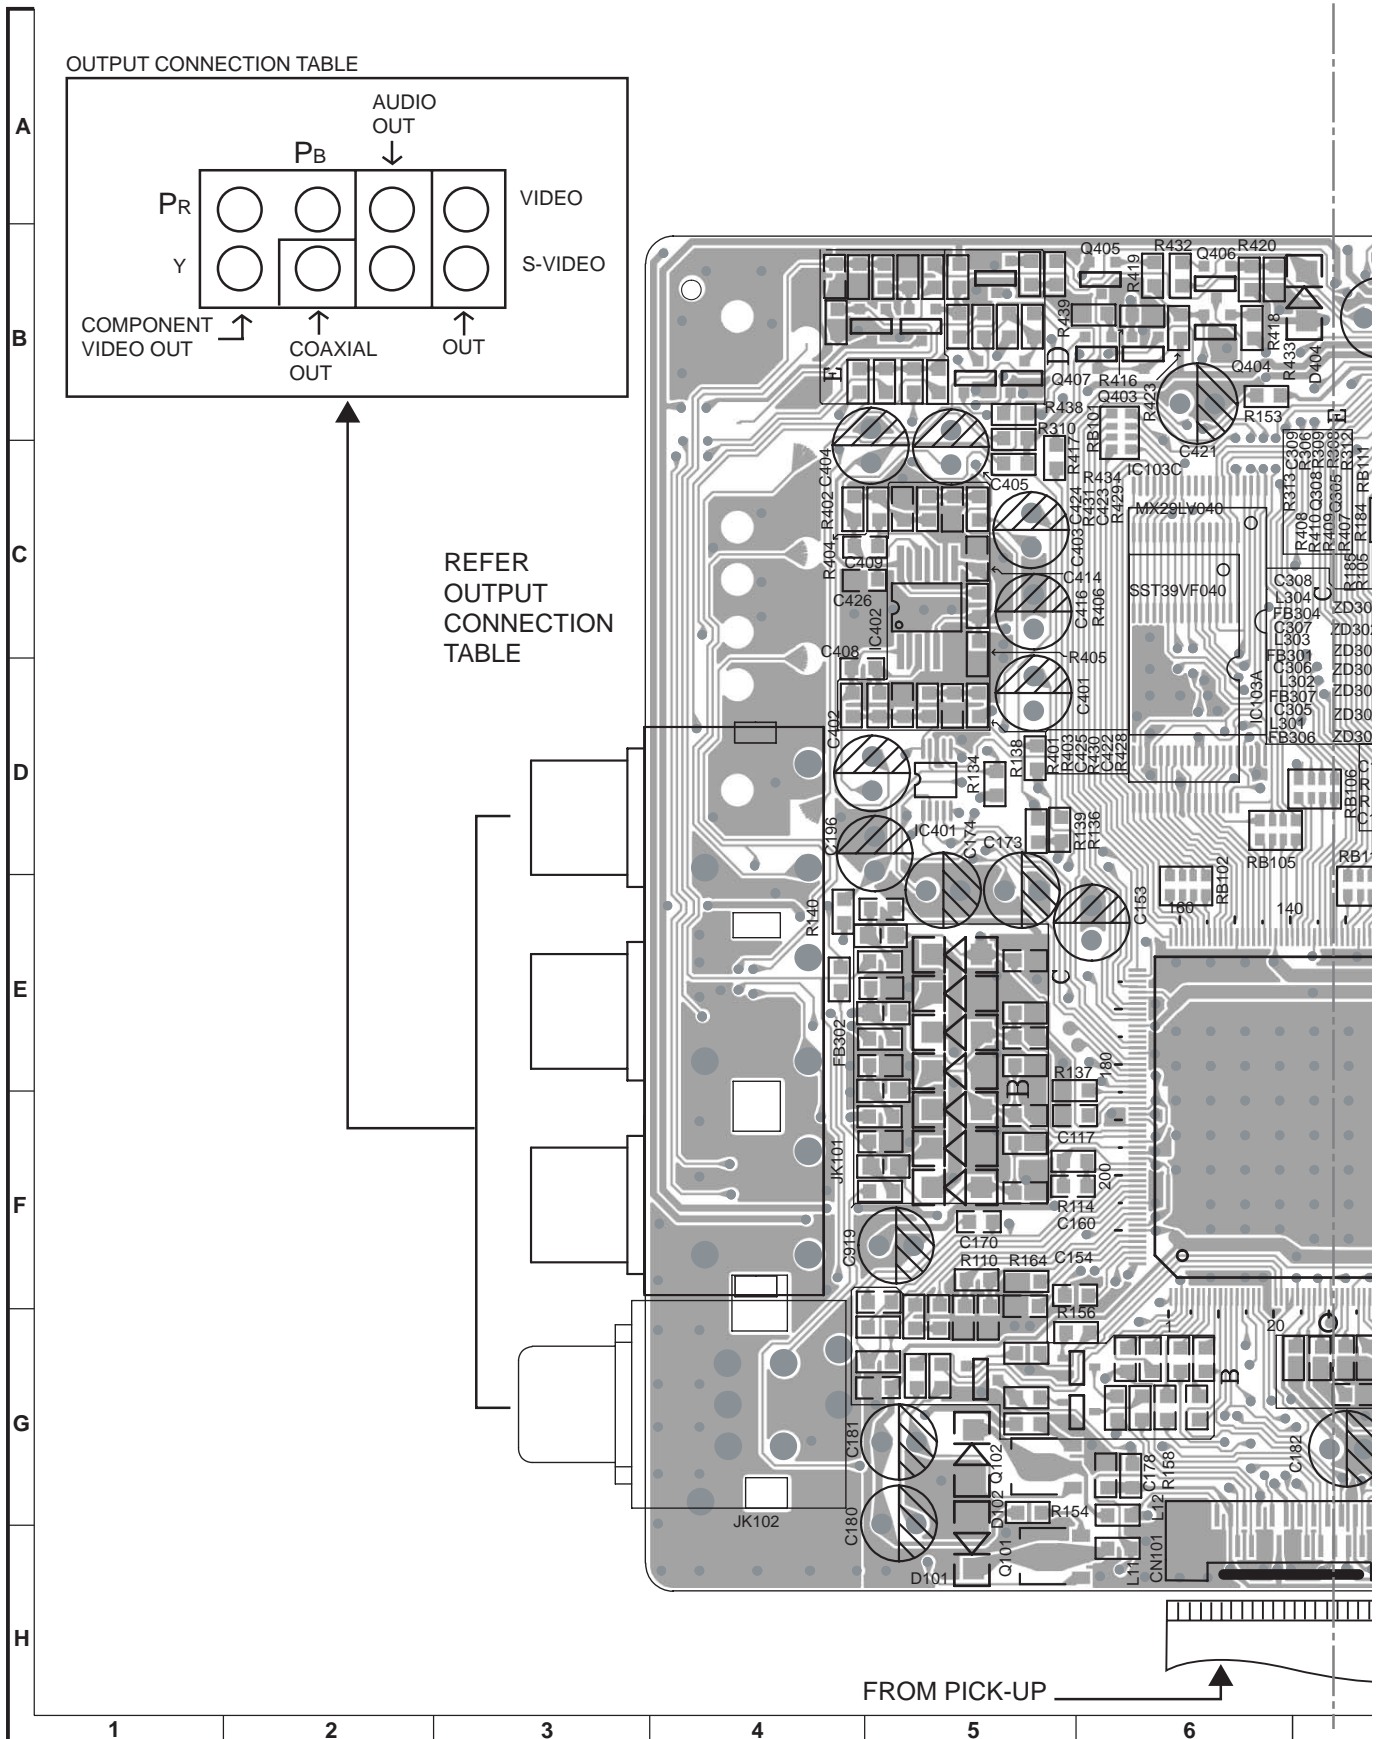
WIRING SIDE OF MAIN PCB (TOP VIEW) (1/2)
